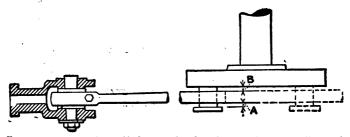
Determining if the crosshead and crankpins are in line and parallel.
